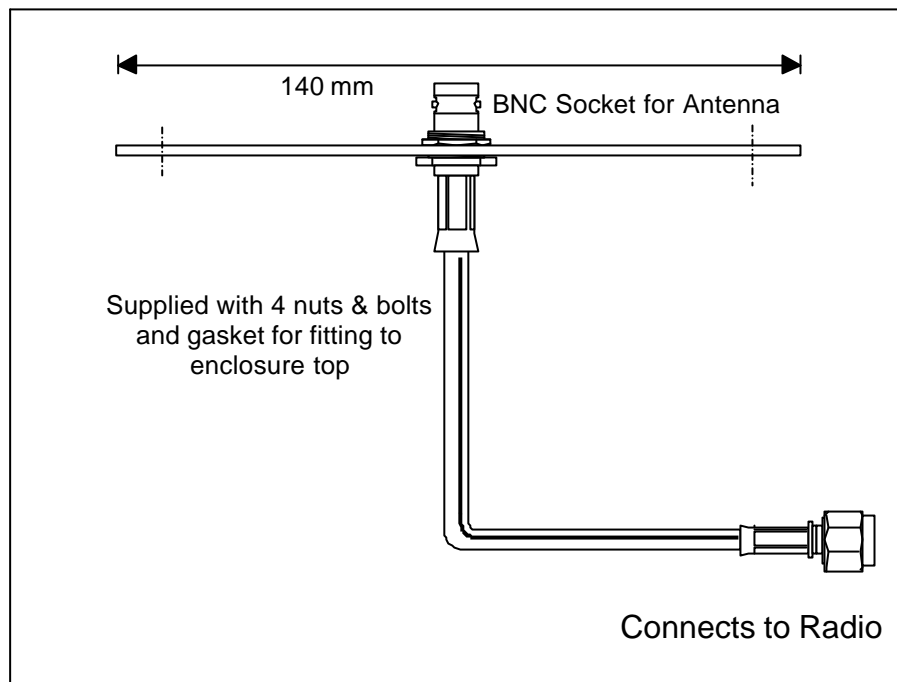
Mechanical Drawing of Antenna Top Plate Mounting Kit
